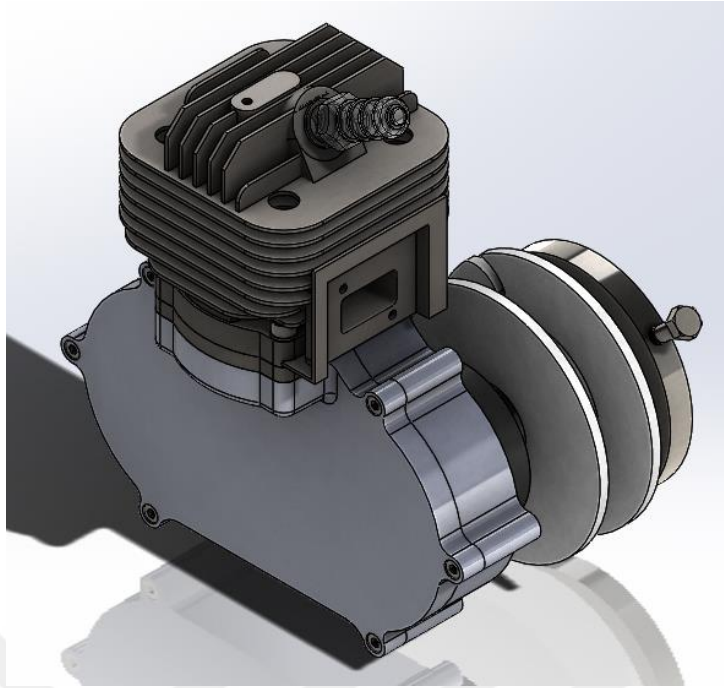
Isometric view of rhombic drive mechanism engine.
